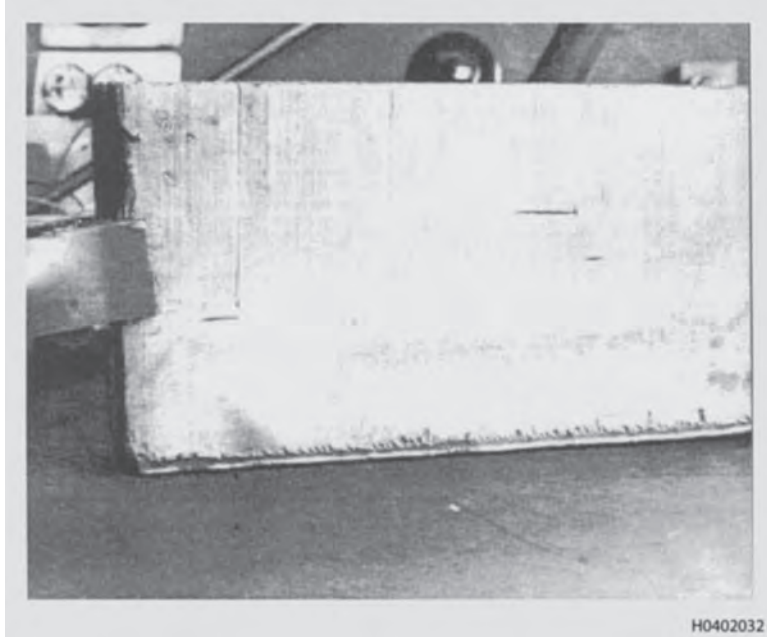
Magnetic Particle Indications of Laminations Shown on Flame-Cut Edge of Thick Steel Plate
